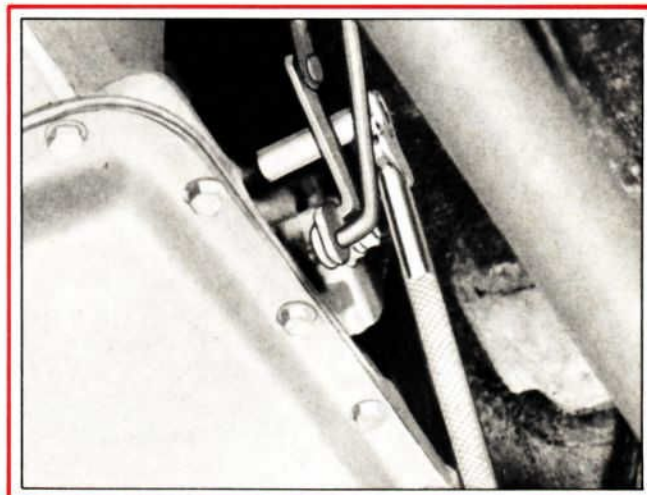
Adjusting the C6 Intermediate Band Externally Using a Special Tool
